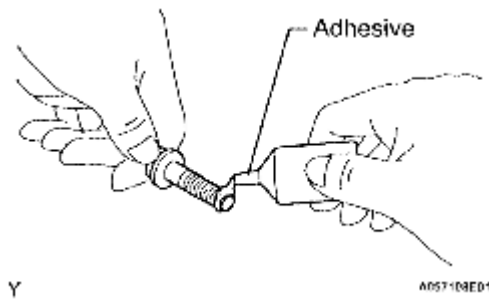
Applying Adhesive To End Or Threads Of Bolts
